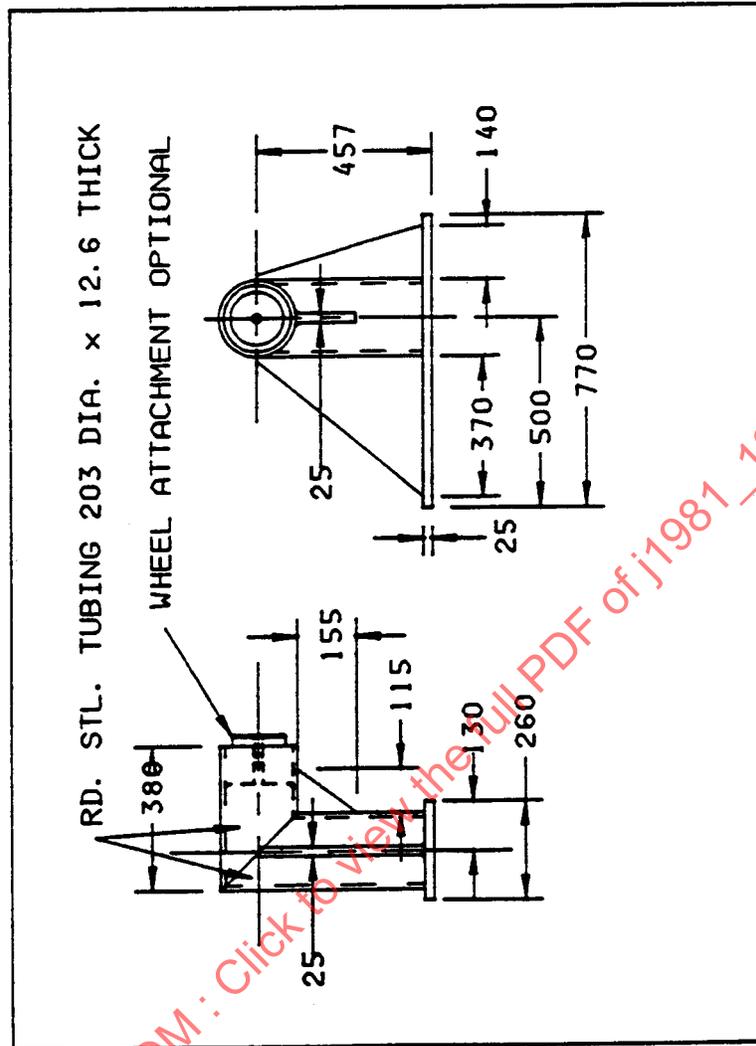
DETAIL OF WHEEL-HOLDING FIXTURE
